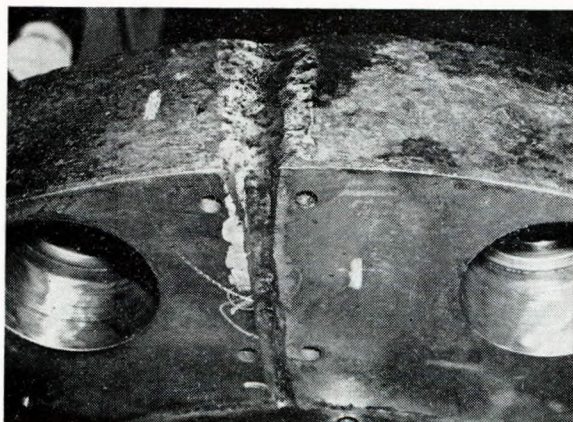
Corrosion of a tail shaft, flange adjacent to the Kamewa stainless steel cover plates
